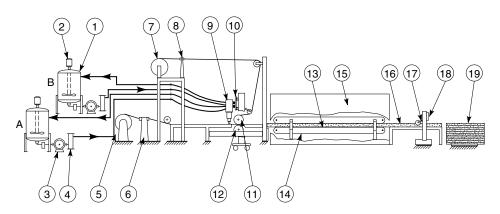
Rigid foam laminating line: 1, material tank; 2, agitator; 3, metering pump; 4, heat exchanger; 5, bottom facer roll; 6, bottom facer alignment device; 7, top facer roll; 8, top facer alignment device; 9, mixing head; 10, traverse assembly; 11, top nip roll; 12, bottom nip roll; 13, take-up conveyor top belt with adjustable height; 14, take-up conveyor bottom belt; 15, curing oven; 16, laminate; 17, side-trim saws; 18, cutoff saw (traversing); 19, laminated-panel stack and packaging.
